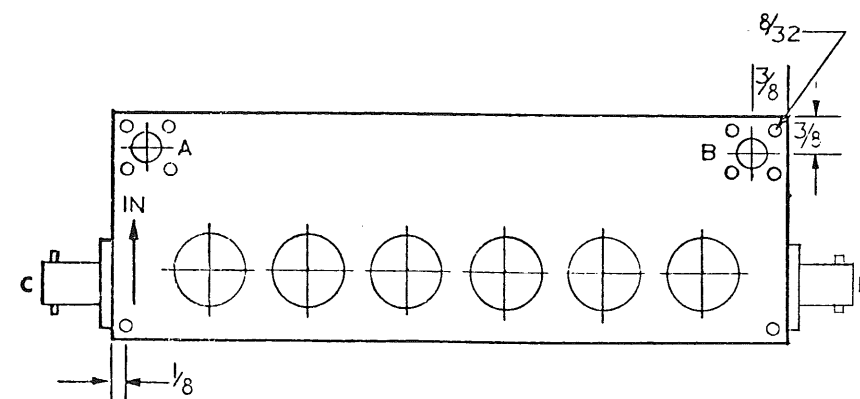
PANEL MOUNTING AND CONNECTOR CONFIGURATION
